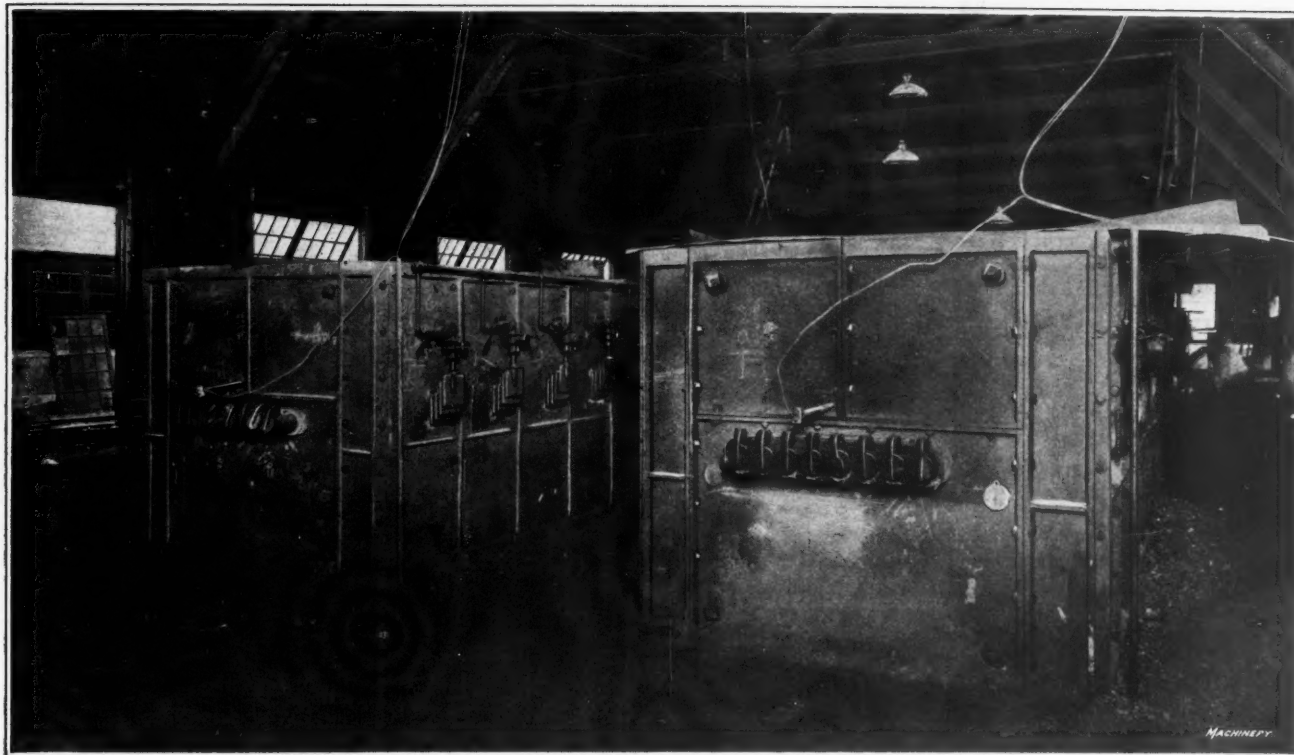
Discharge End of Tempering Furnace. Shells are pushed out through Tubes which have Hinged Covers to exclude Air, shown at Front of Furnaces
